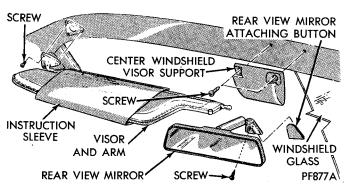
Visor and Rear View Mirror (D-1,2,3)
